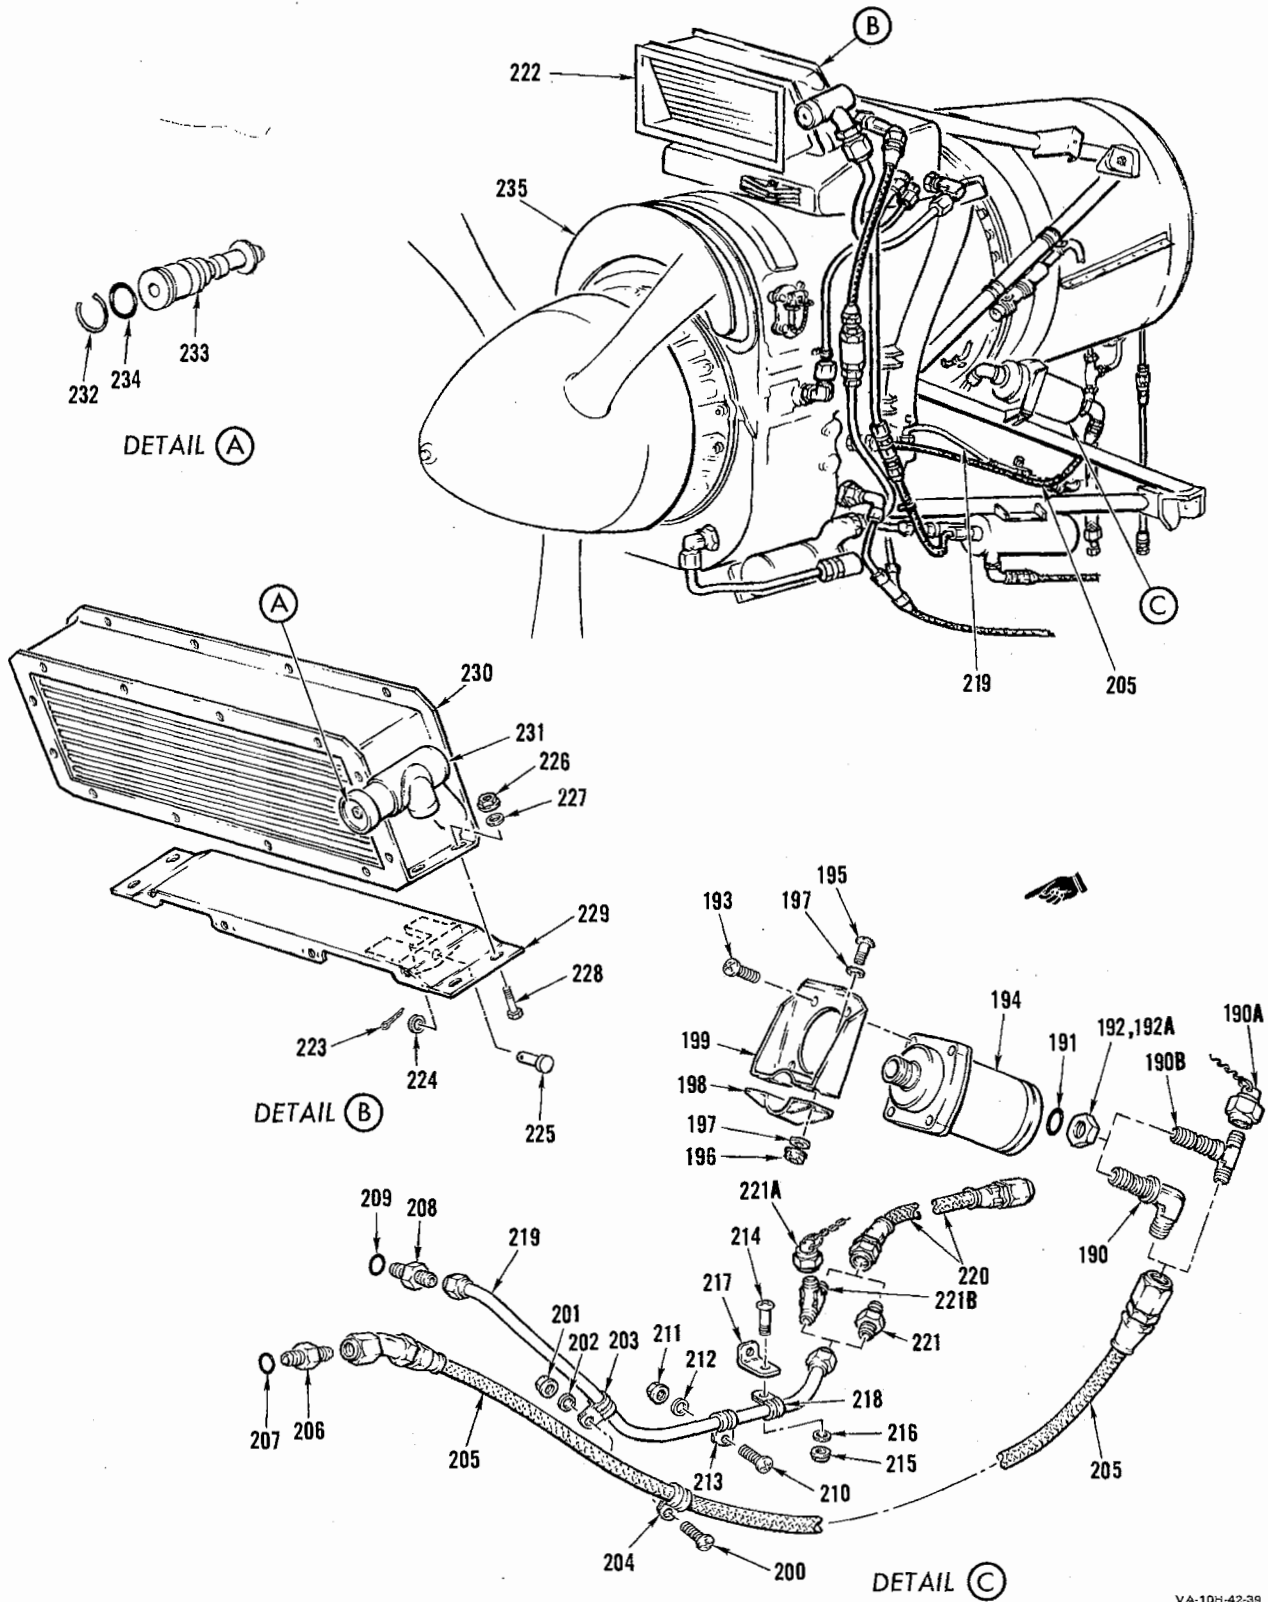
Pod Package - Engine Accessories (Sheet 4)
